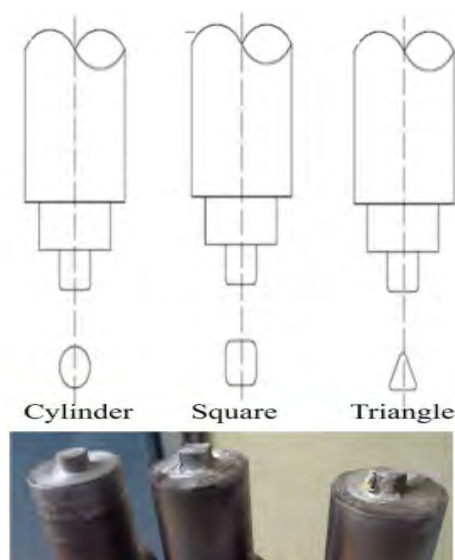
Tool geometry employed in the friction stir welding experiments
